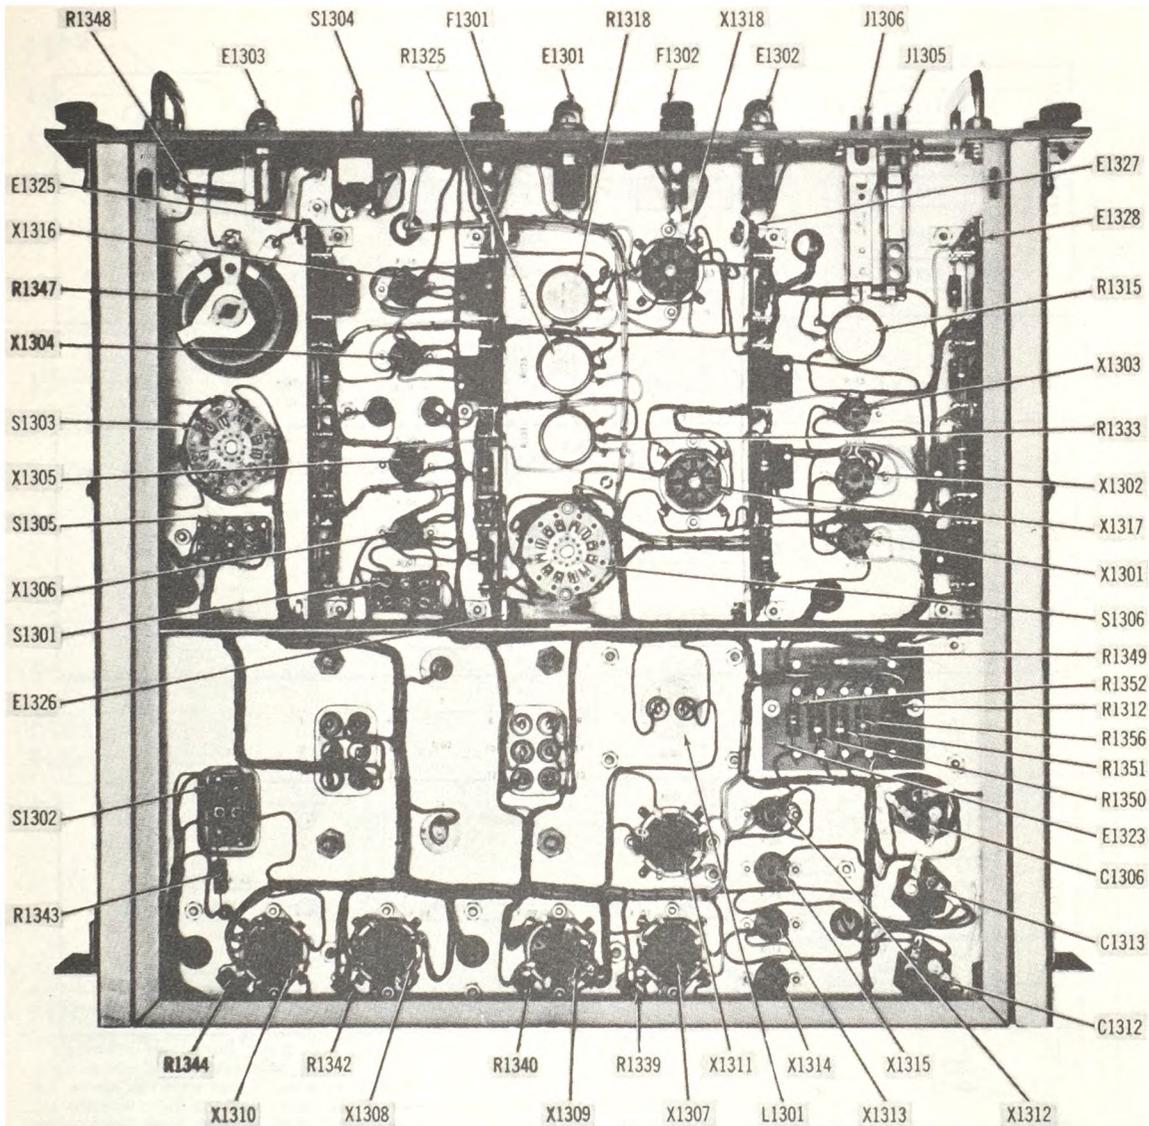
Bottom View of Telegraph Carrier Receiver
